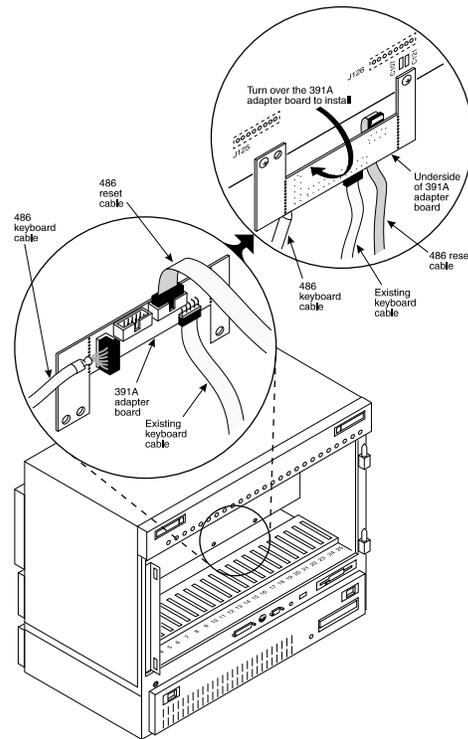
CPU/RMB Keyboard Adapter Installed in the MAP/100C
